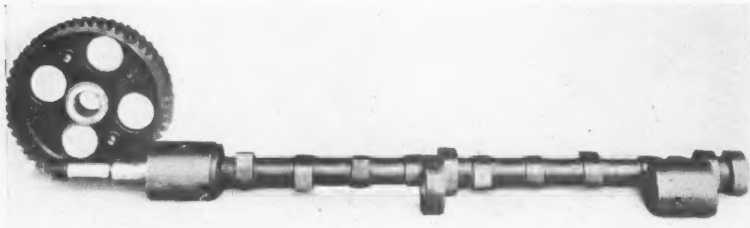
Camshaft With Gear Removed and With Front Bushing on Shaft. The Center and Expansion Plug Bushings Are Shown Displaced
